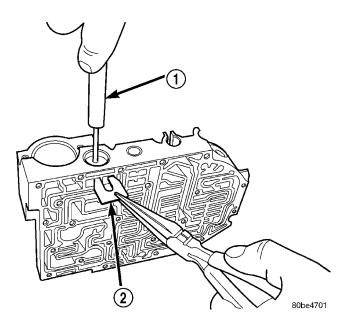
Install Regulator Valve Spring Retainer using Tool 6302
